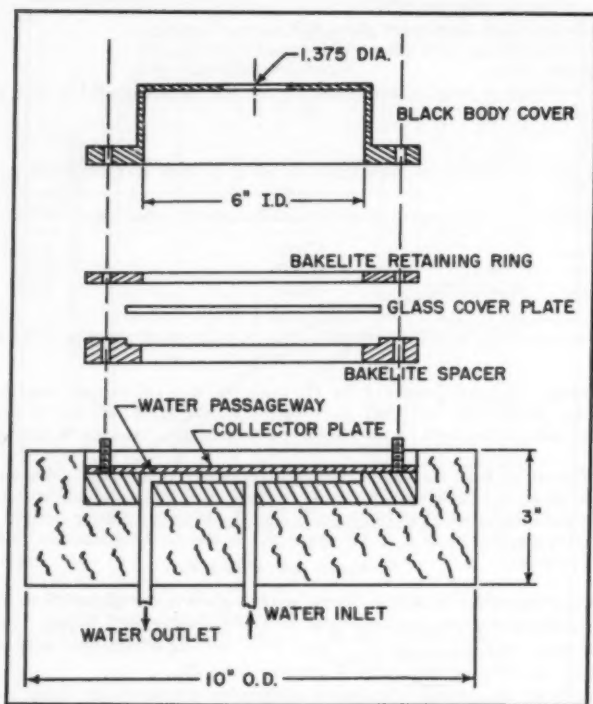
6-IN. DIAM COLLECTOR USED WITHOUT COVER, WITH 1 GLASS COVER, OR WITH BLACK BODY COVER
